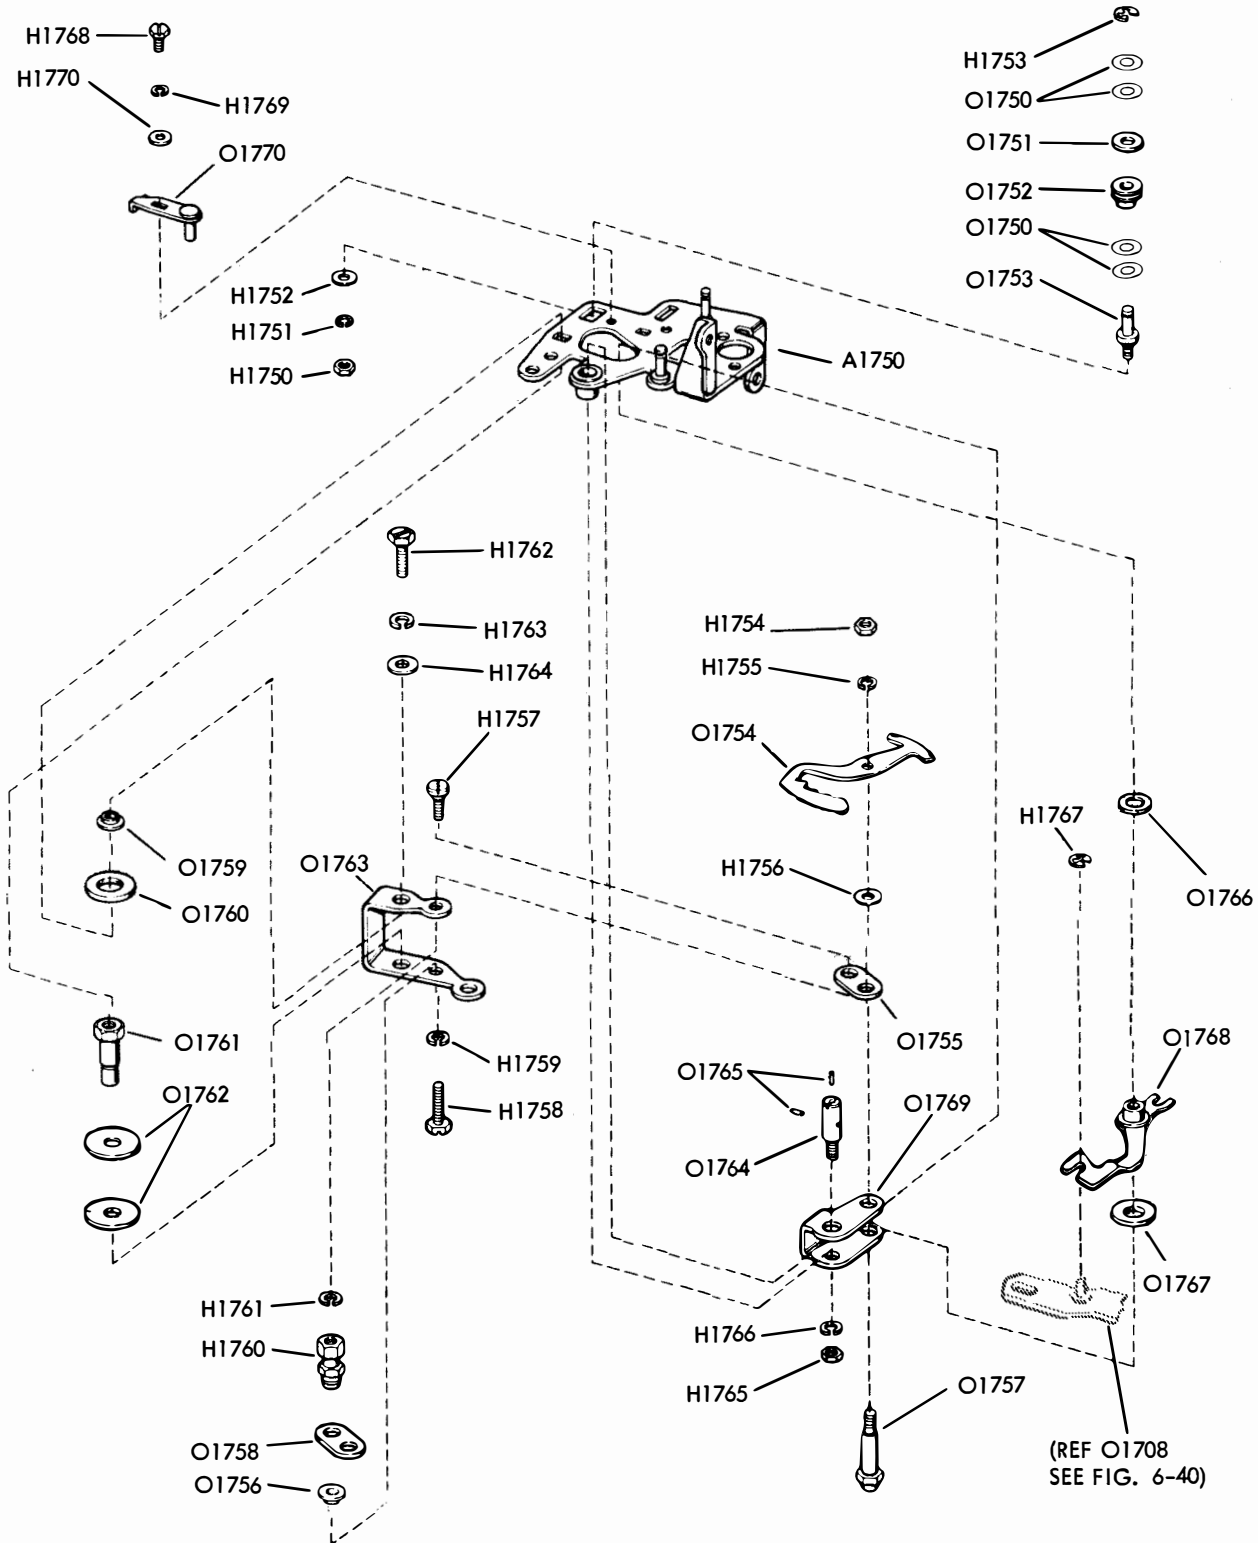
Typing Reperforator, Axial Positioning Mechanism
